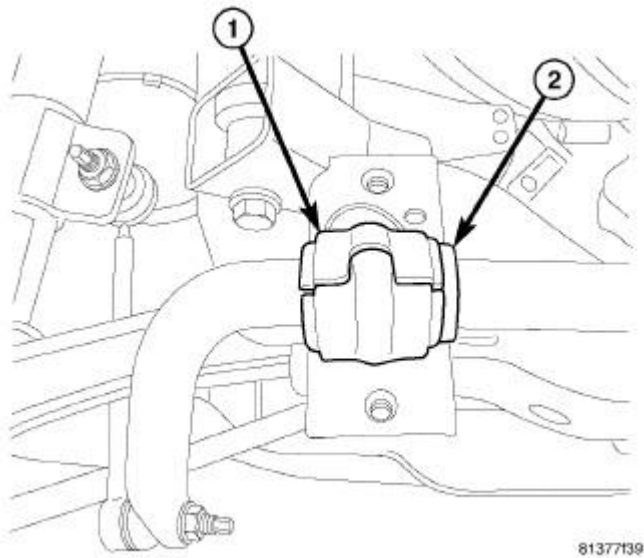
FRONT STABILIZER BAR BUSHING ON BAR
